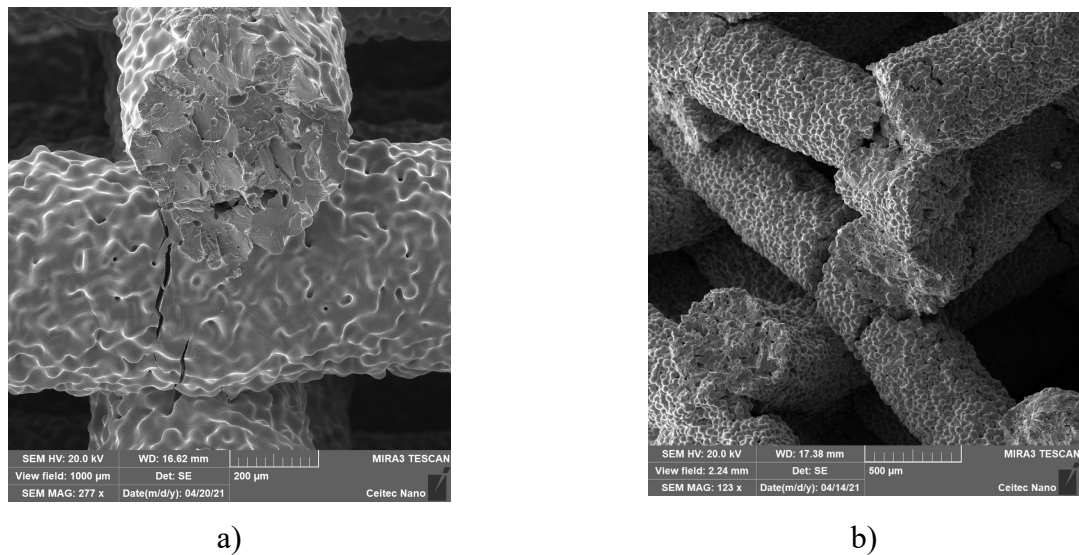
Surface cracks and fibre fractures at critical sites in a) compound filaments and b) porous filaments. Note that the surface cracks and fracture surfaces in both types of fibres occur at the locations of tensile stresses near the contact points of overlapping filaments.
